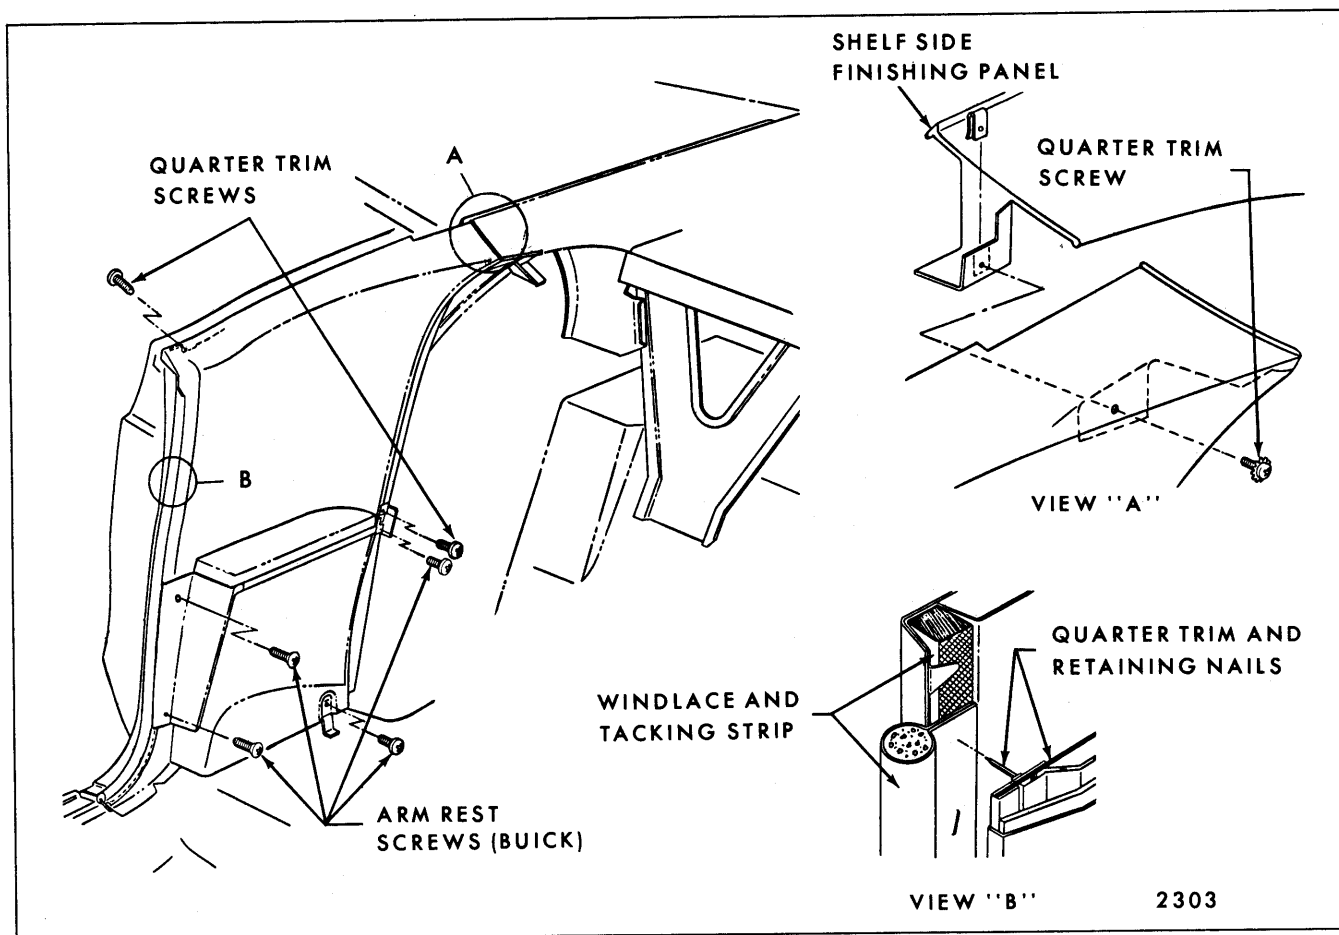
Rear Quarter Arm Rest and Trim Assembly - "E" Styles
